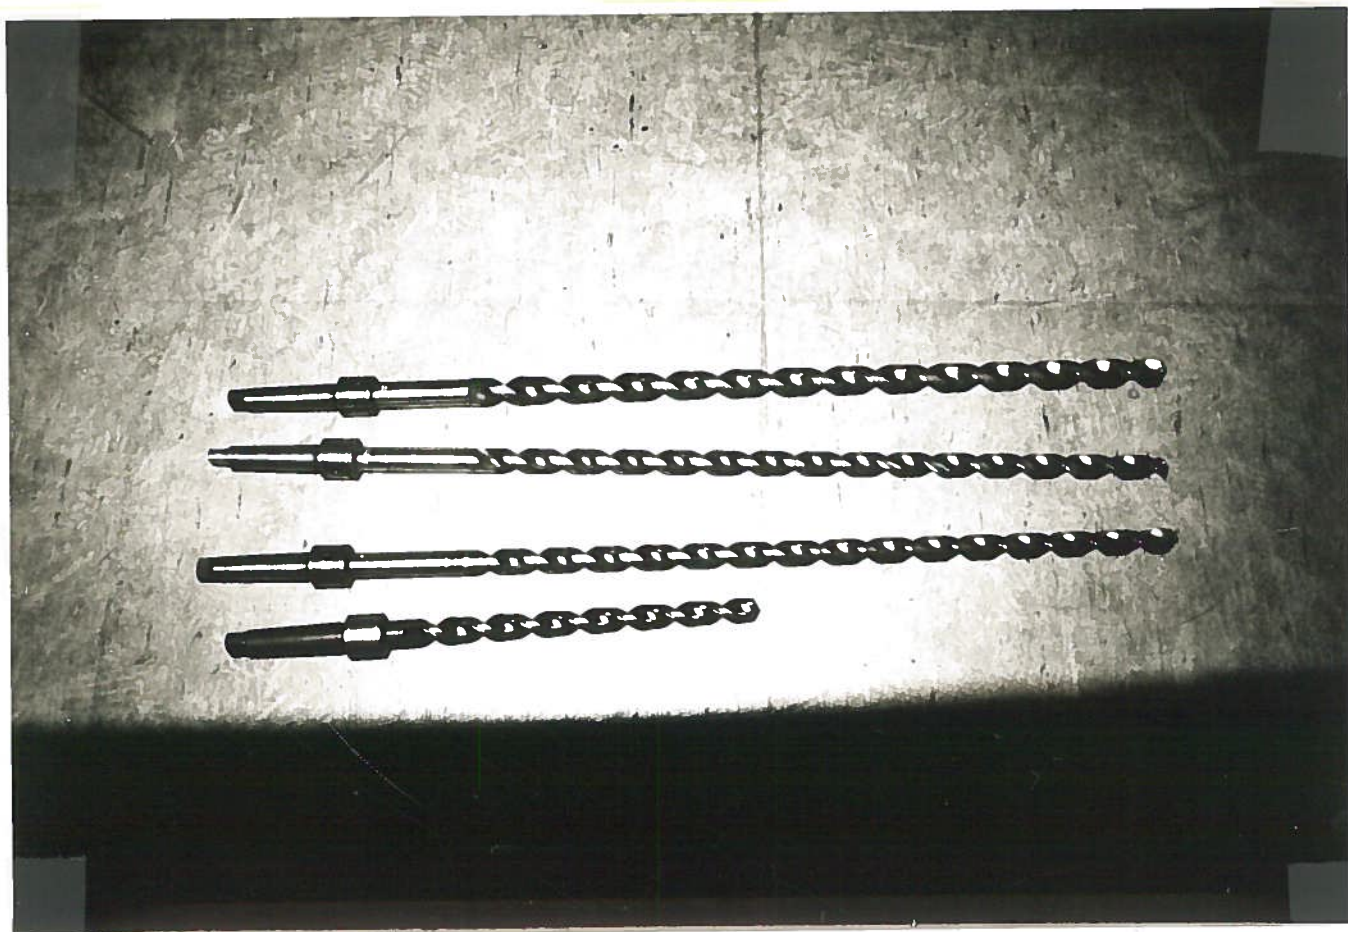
View of the tools for drilling the trimming coils leads holes on the pole caps.
